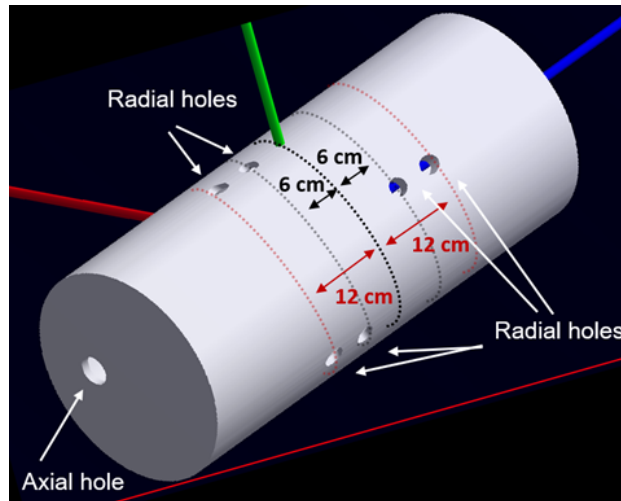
Stainless steel plasma chamber drilled with 20 holes of diameter 40 mm.
